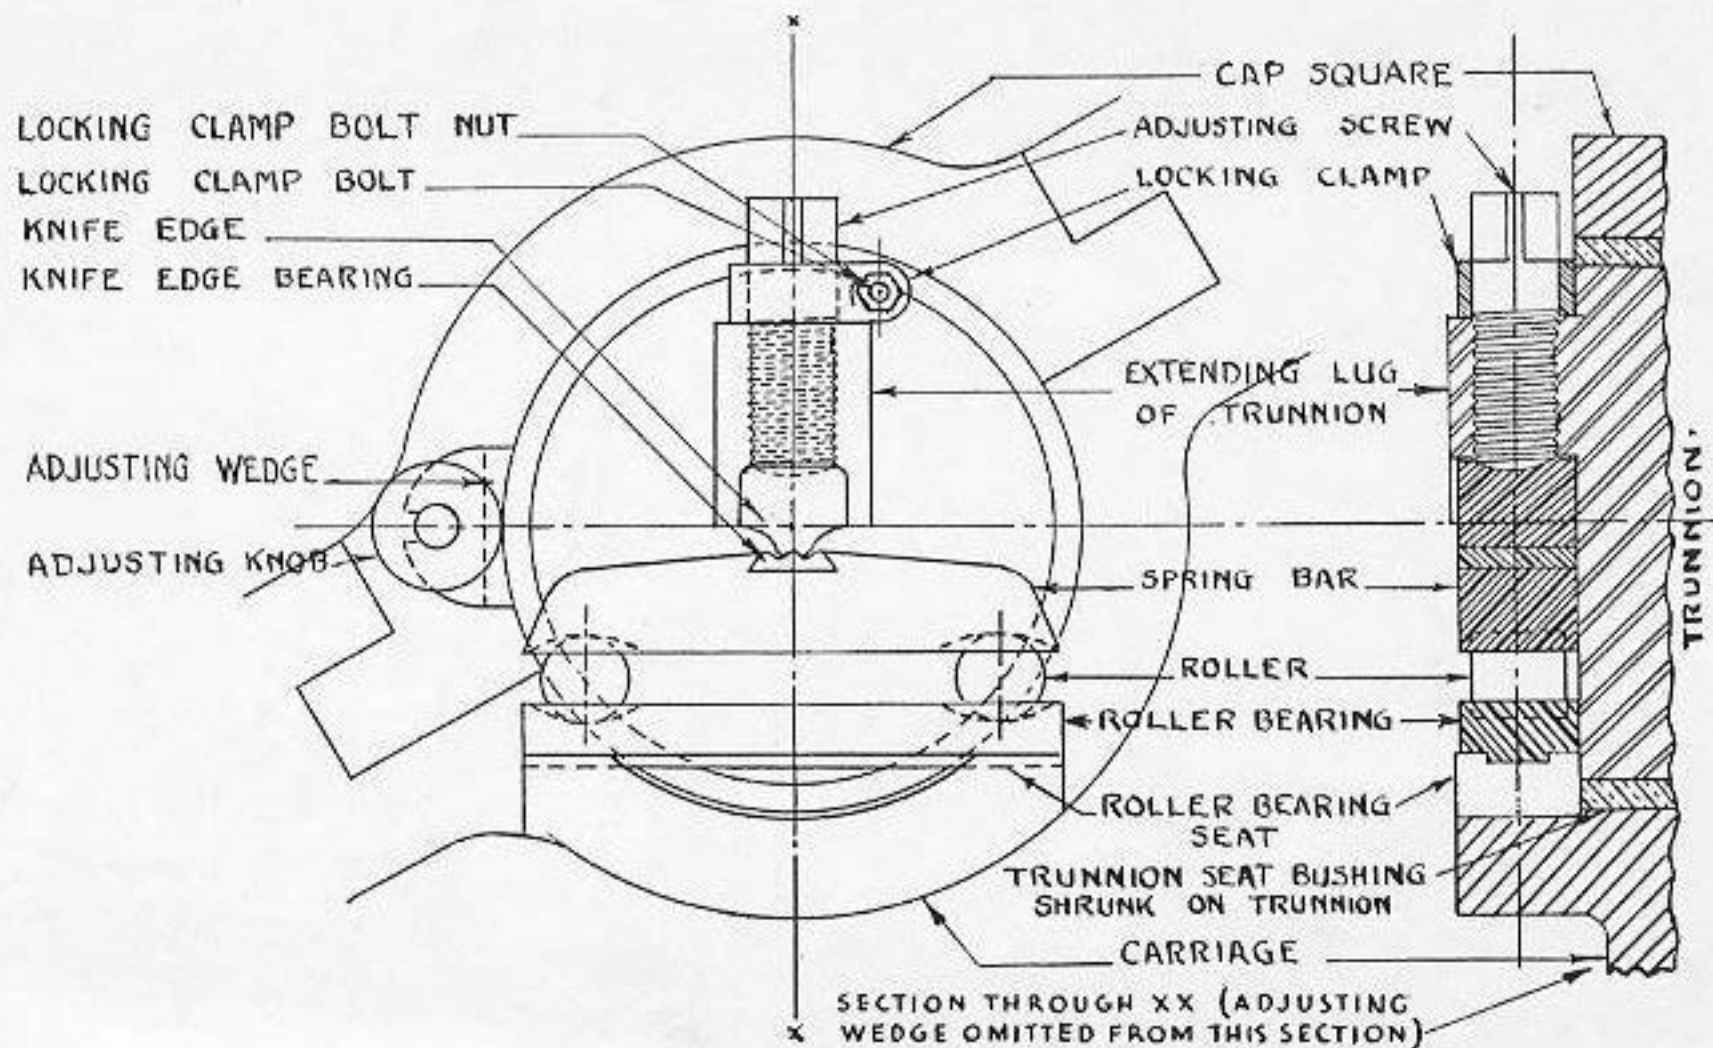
DETAILS OF FRICTIONLESS TRUNNION BEARING.
